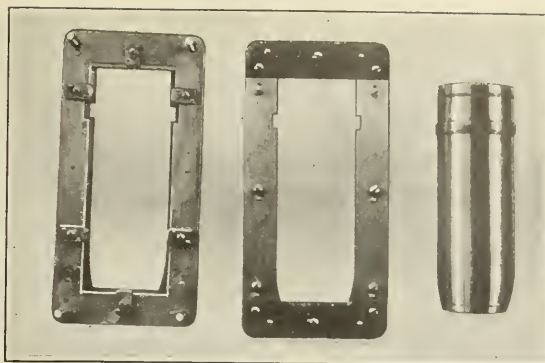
A Built-up Type of Profile Gage for Russian Shrapnel Shells
